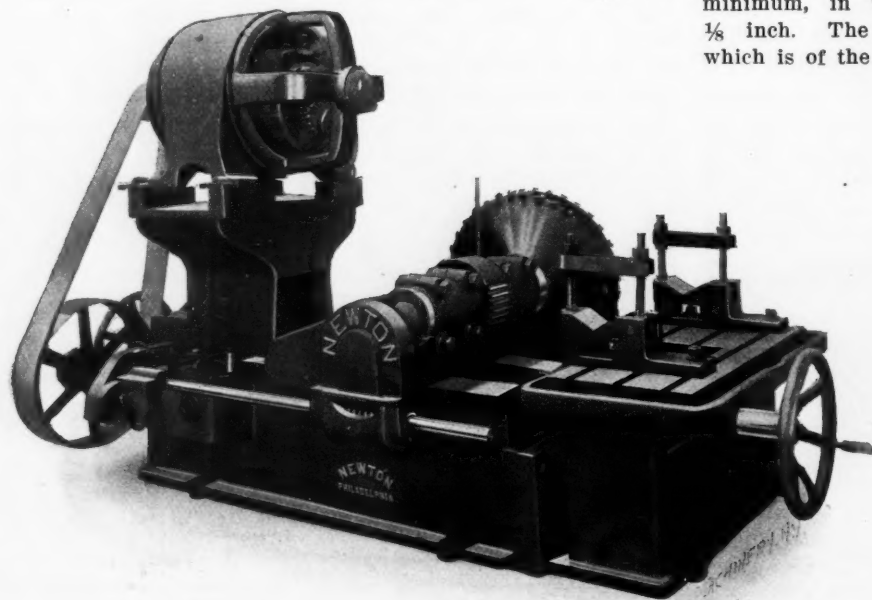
Newton 32-inch Crankshaft Cold Saw Cutting-off Machine
